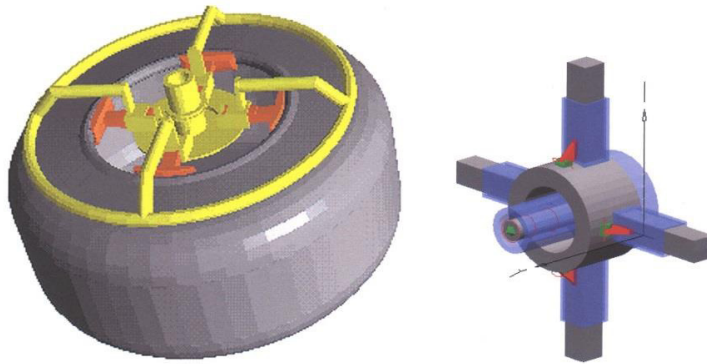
Manipulator clamps and clamping mechanism for tyre clamping.
